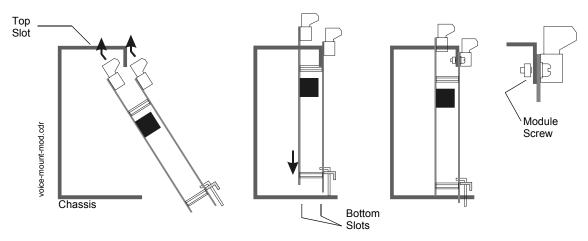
Inserting a Two-Layer Module into CHS-4N or CHS-M3 Chassis
